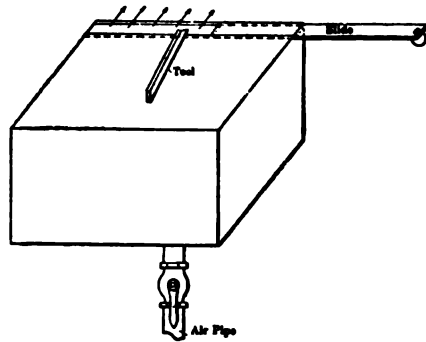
Air box for air cooling of high-speed tools. Convenient for hardening lathe tools and those of similar shape.
